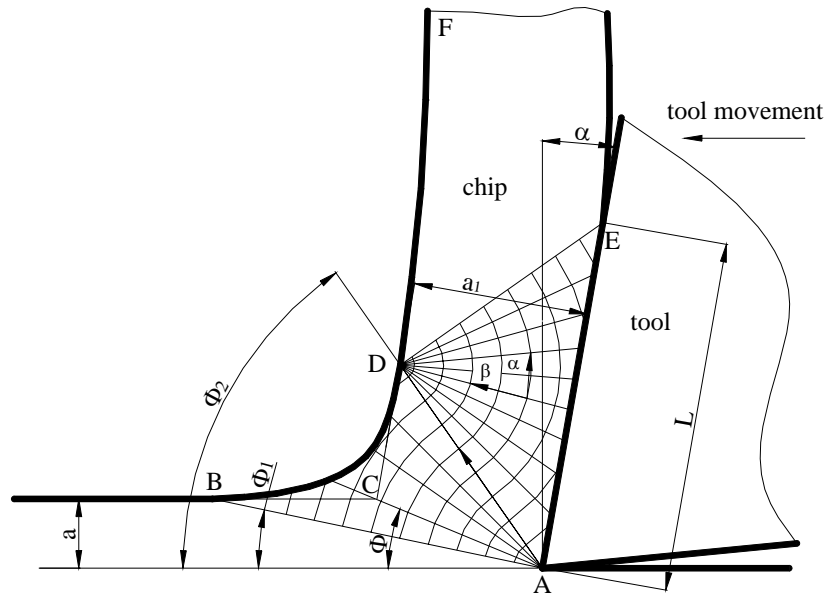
Slip-line field for cutting by tool with whole rake face.
